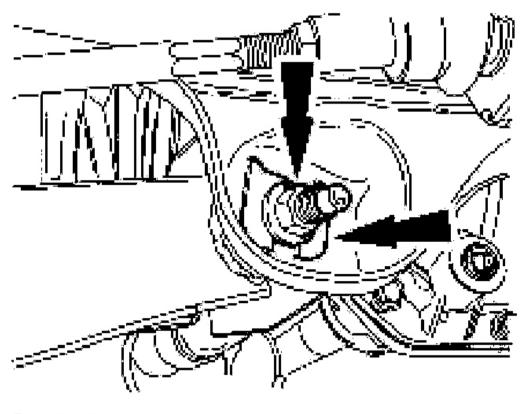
Installing Washer And Nut Courtesy of FORD MOTOR CO.
